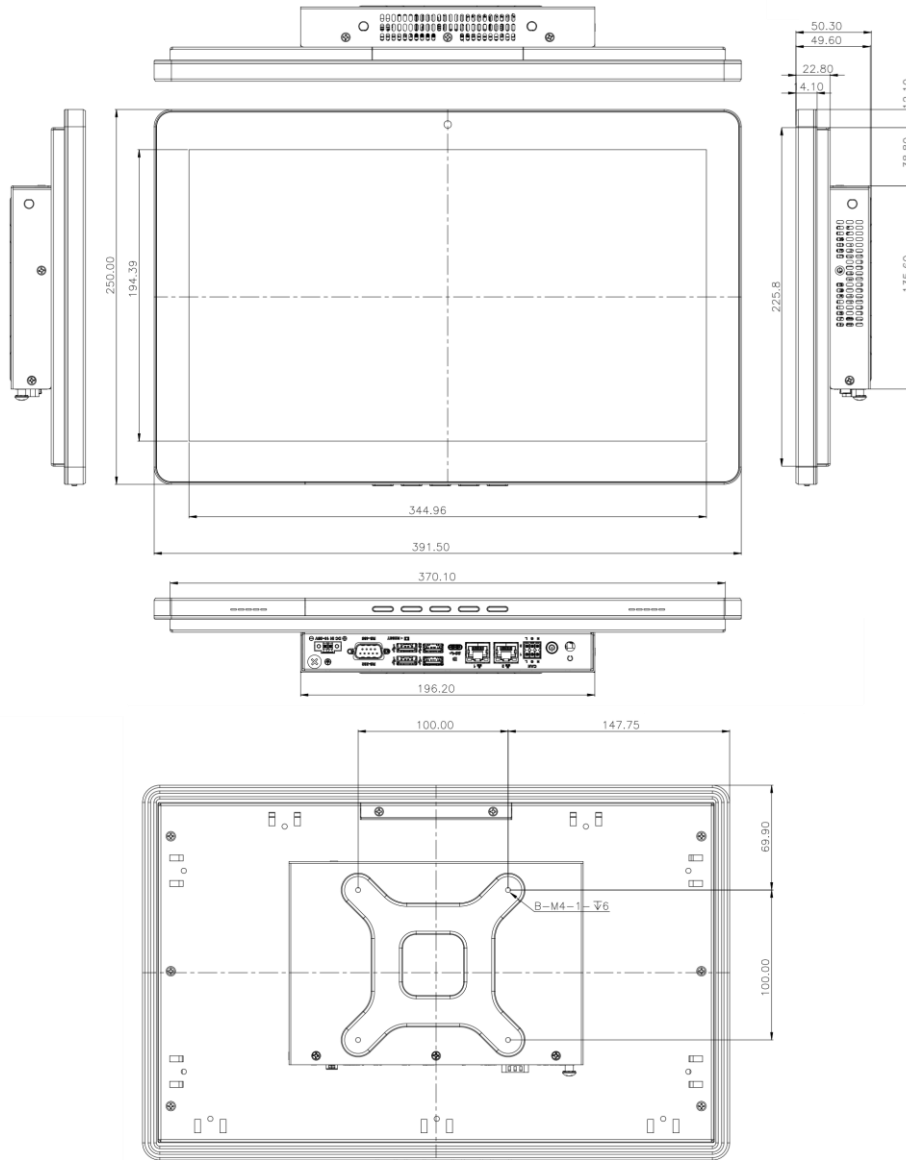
AURA-W156-RK3576 Dimensions (mm)
